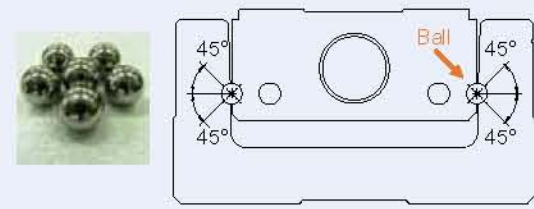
Cross-sectional shape of the linear guide element of a MONOCARRIER
